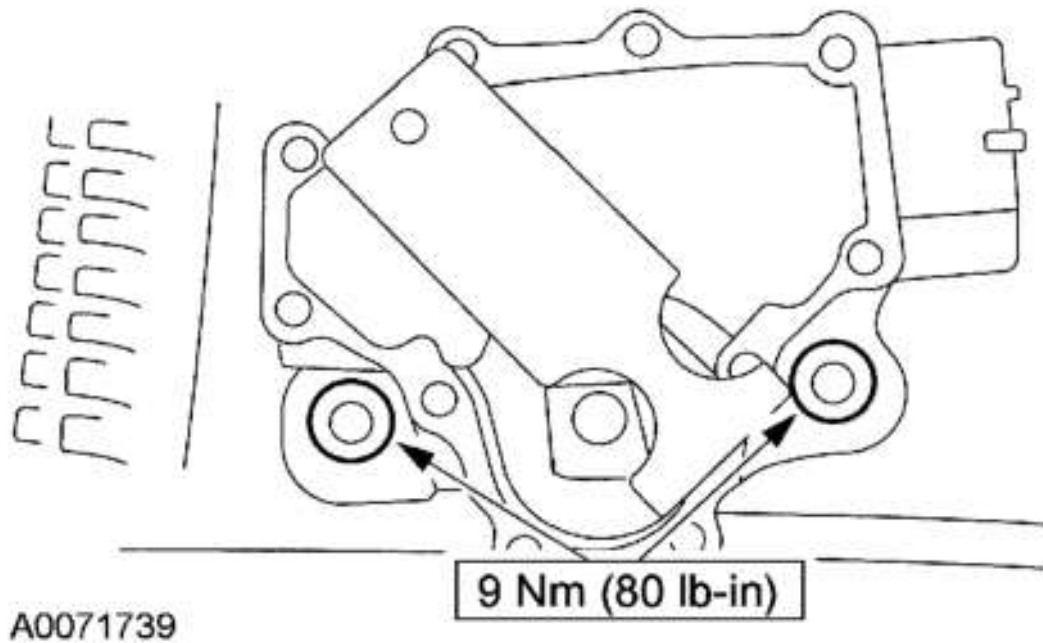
Identifying Digital TR Sensor Bolts - With Torque Specifications
